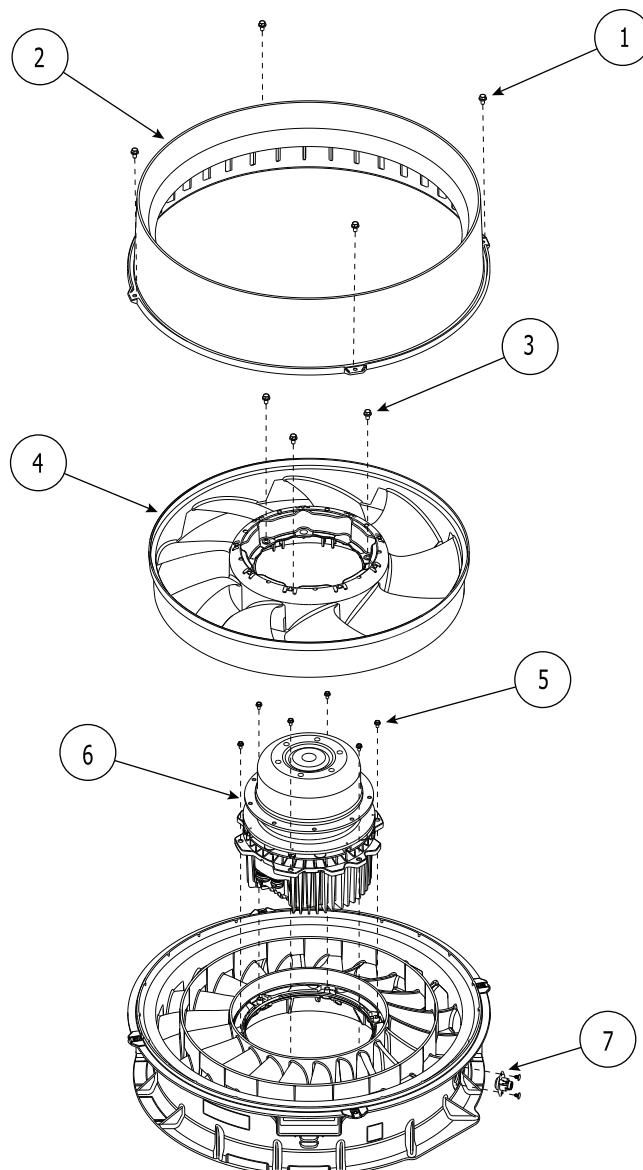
Disassembling High Static Motor and Fan Assembly
